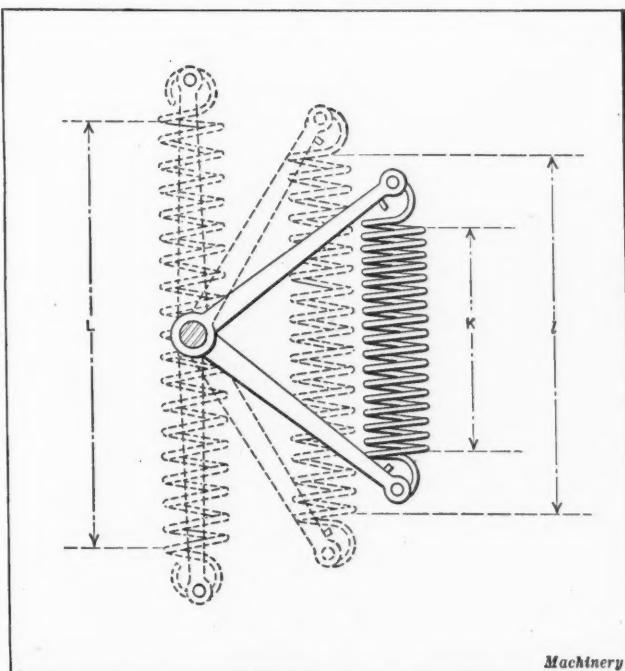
Toggle Mechanism involving Problem in Spring Design
